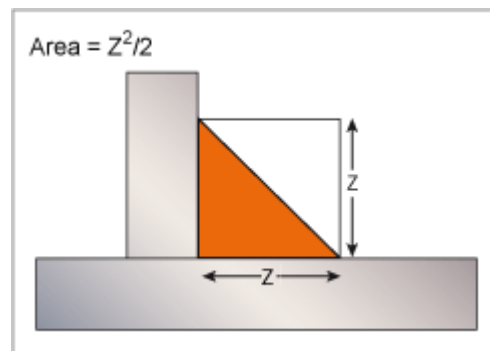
Area of an equal leg length fillet weld. (Mathers n.d.).
